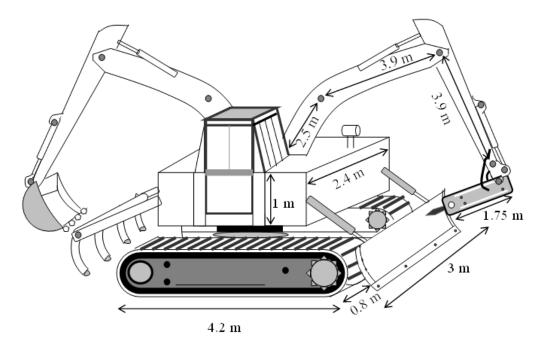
Suggested design of a combined machine (hydraulic excavator and bulldozer)
